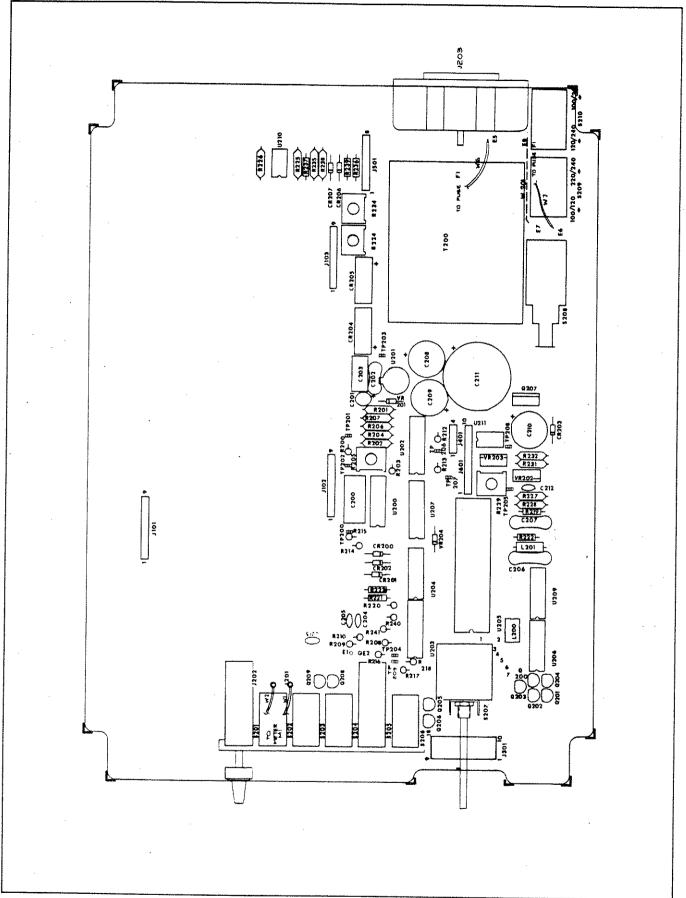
A1 8921A Main PCB Assembly (cont)
